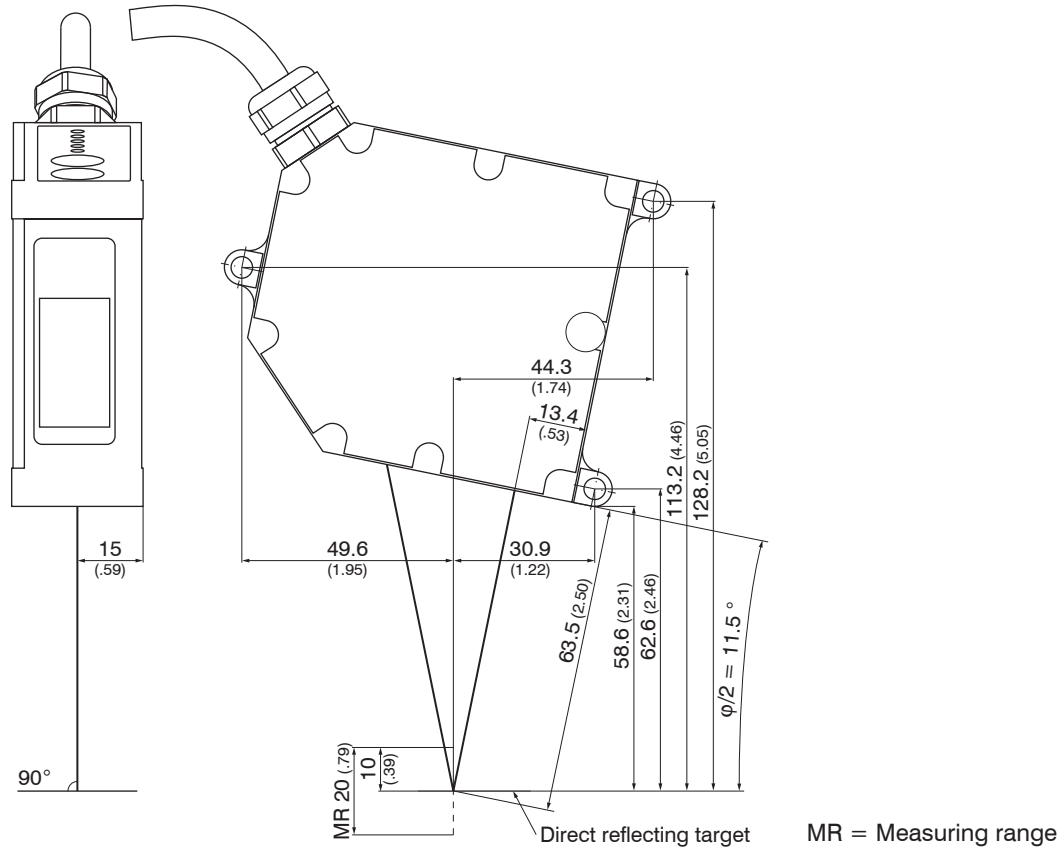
Dimensional drawings optoNCDT1700-20DR, dimensions in inches, not to scale
